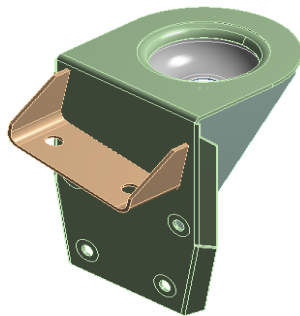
CAD model of Cabin Mounting Bracket Assembly
